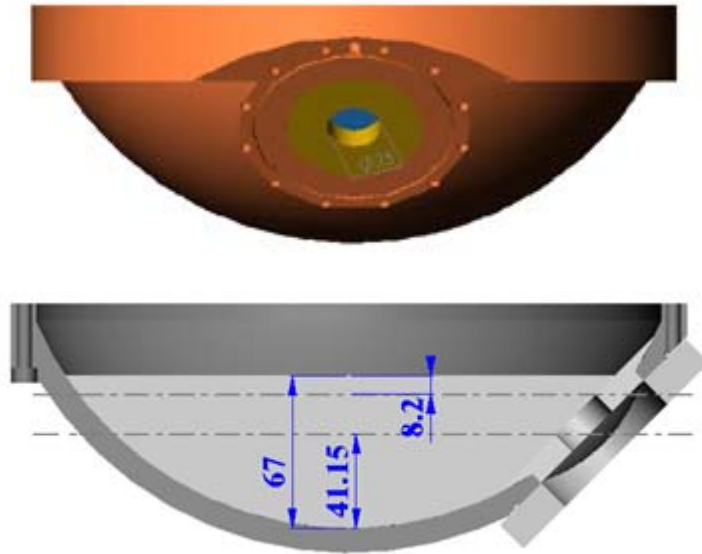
Lower head with lateral hole with 25 mm diameter
